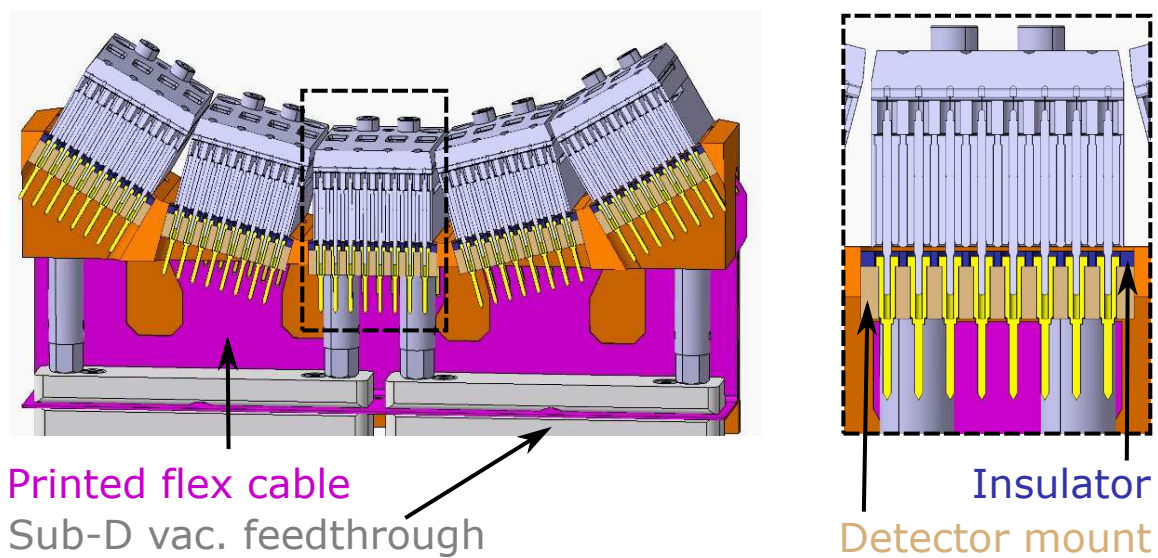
Cut away of a bolometer module assembly (left). Zoomed in image of a single bolometer head with the pin mounting scheme and insulator indicated (right).
